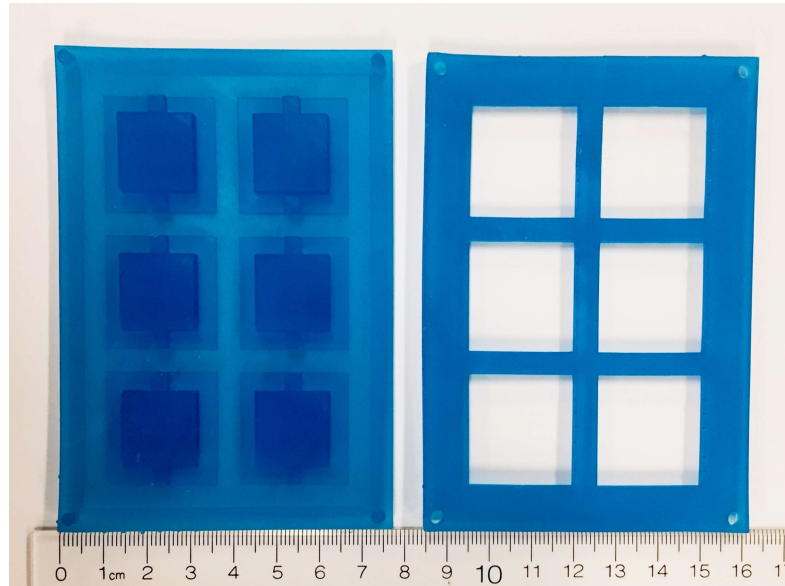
Tough resin two-piece mold. The sides of the mold press fit onto the bottom of the mold. When PDMS is cured, the frames can easily be released from the mold by removing the side piece.
